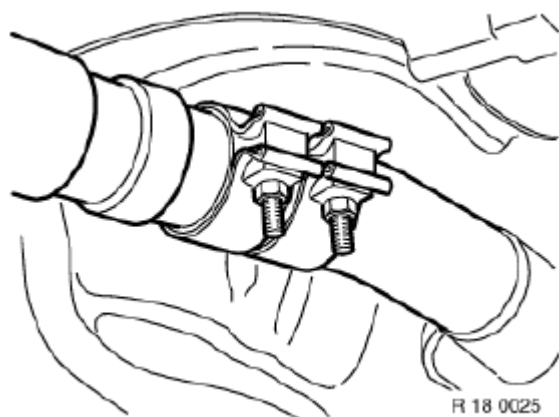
Identifying Exhaust Pipe To Centre Muffler
